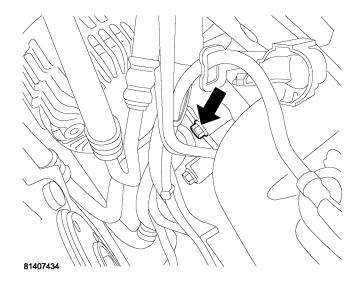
GENERATOR REAR MOUNTING BOLT(4) Loose install rear mounting bolt (Fig. 24).
